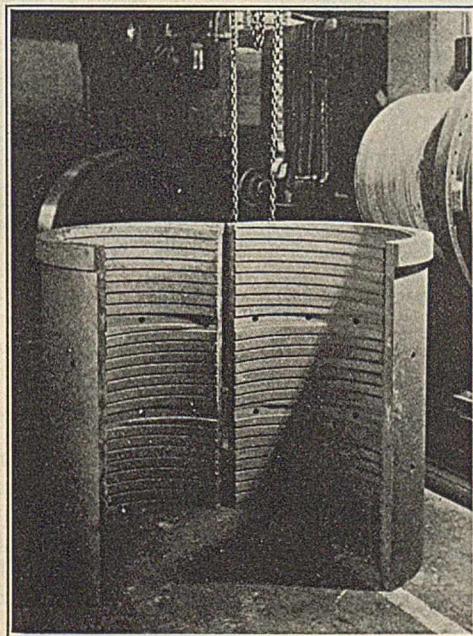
Spirally Grooved Rubber Guide Bearing for 31 1/2-Inch Diameter Vertical Shaft of a 32,000 Horsepower Hydraulic Turbine
